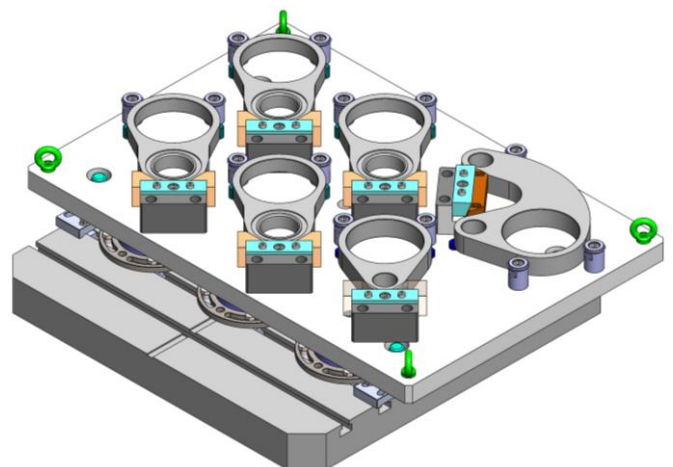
Fixture for mechanical processing of the side and central ears of the tubes.
